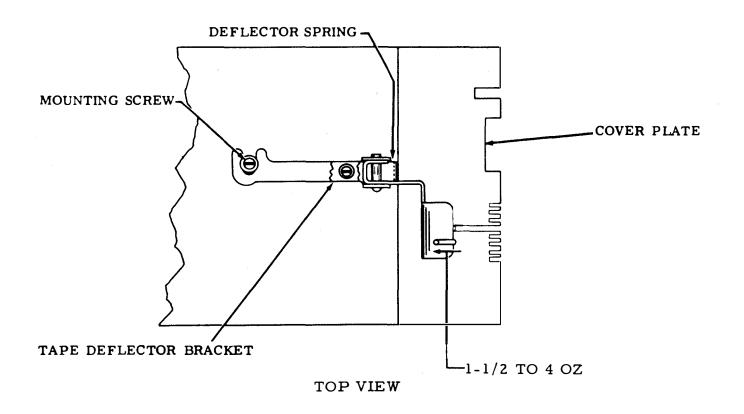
Tape Deflector Bracket and Tape Deflector Spring
